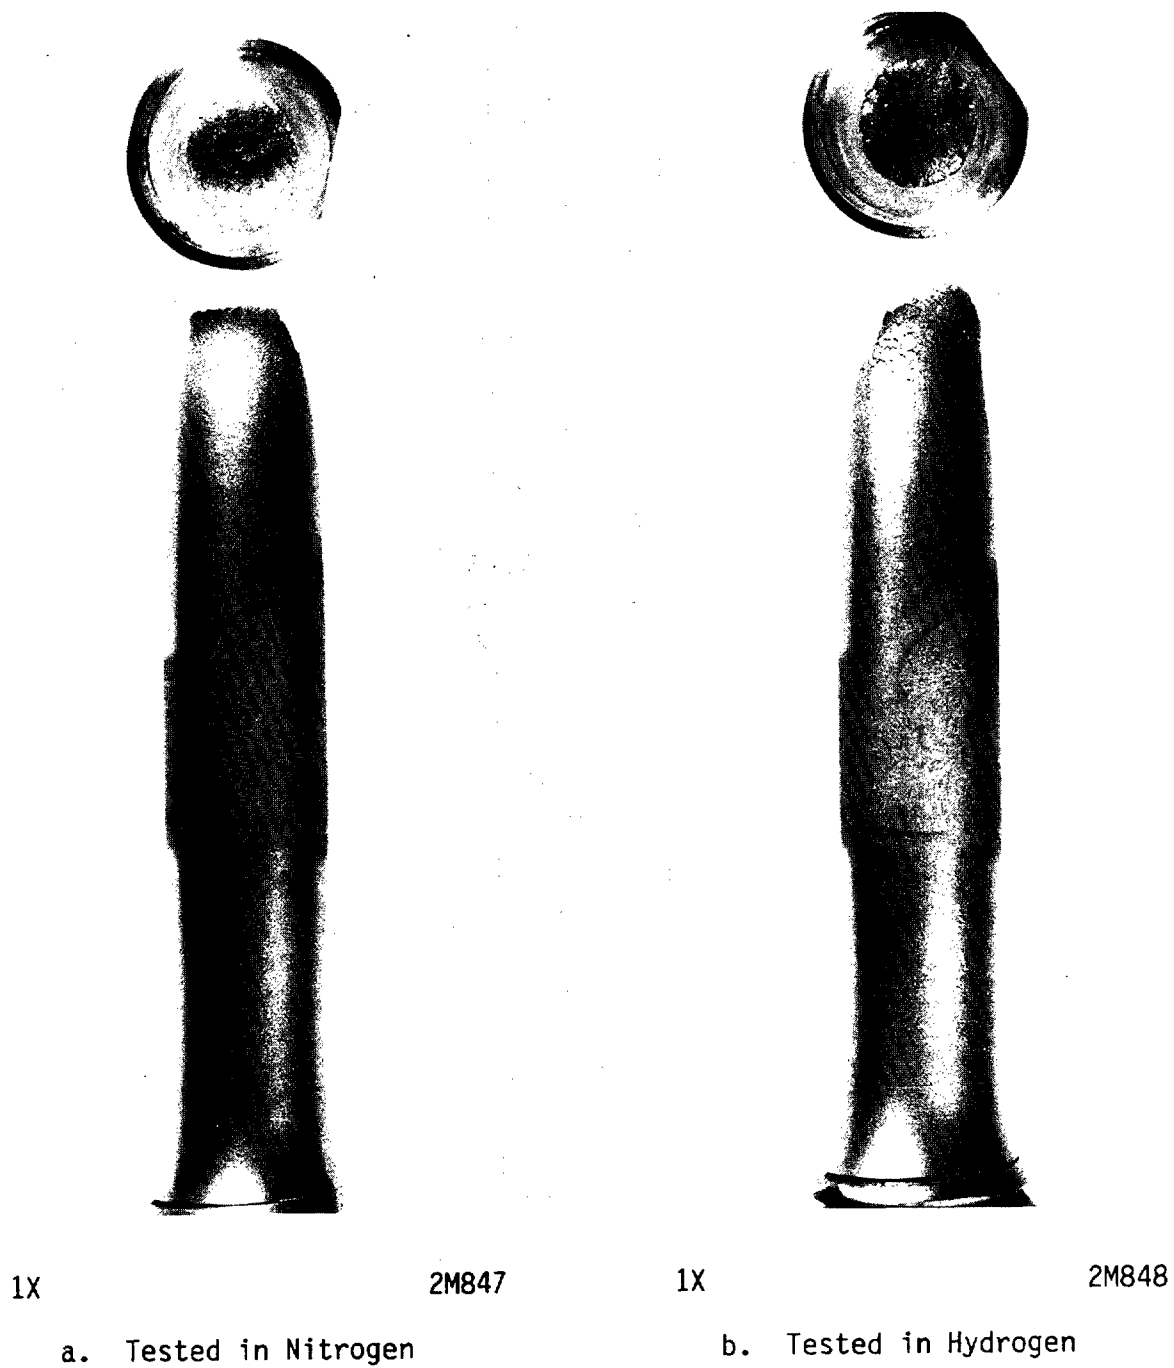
Fractured tensile specimens prepared from welded cast-steel plates provided by Colorado School of Mines.
